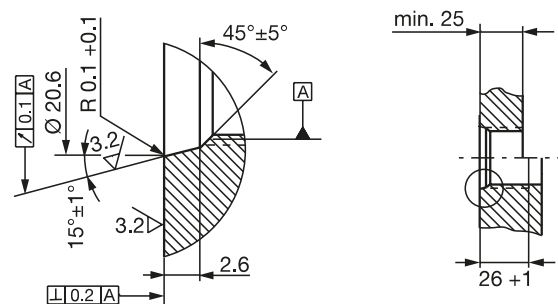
Mounting hole 3/4"-16UNF per SAE J475 O-Ring 15.3x2.4
